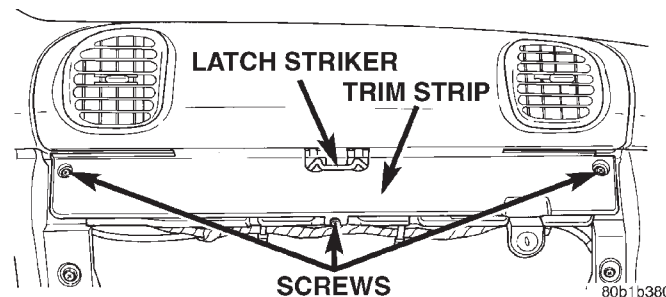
Glove Box Opening Upper Trim Strip Remove/Install
